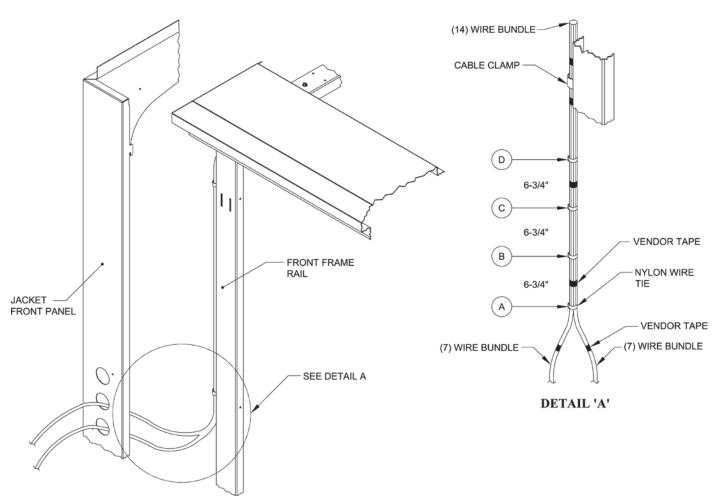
Internal Wiring Harness - Length Adjustment for Penetration Through Side of Jacket Front Panel
